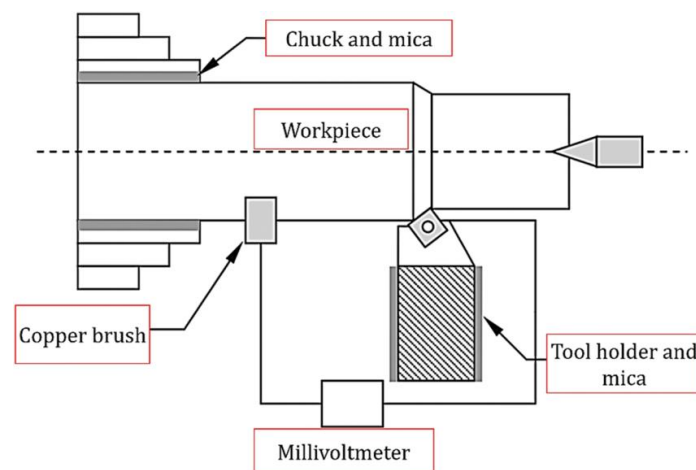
Example of tool-workpiece thermocouple technique for turning process [20]
